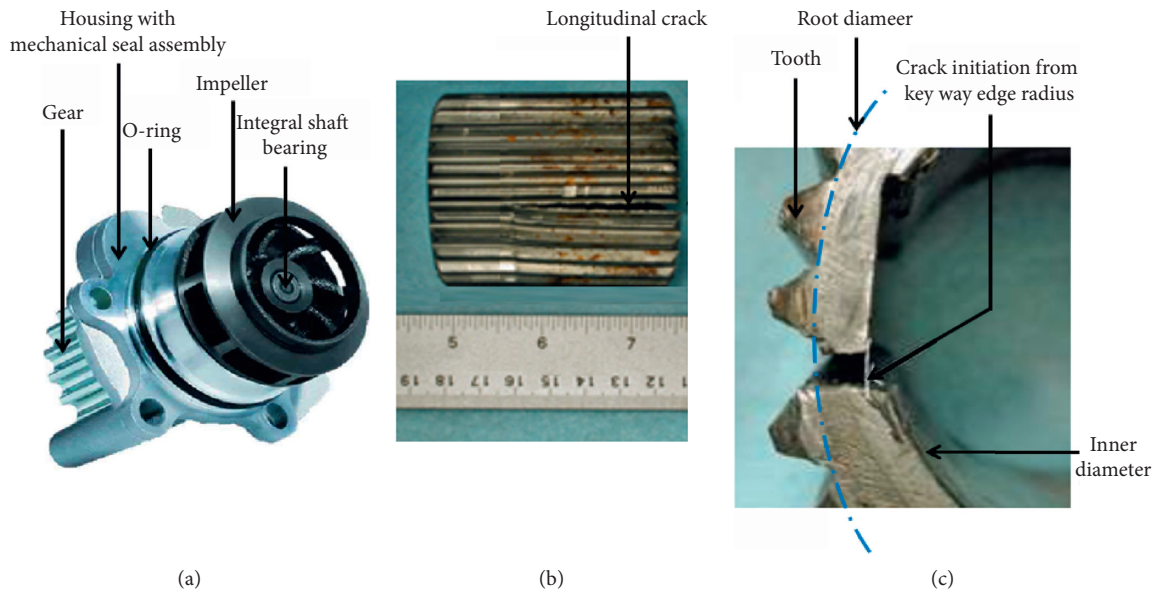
(a) Parts of an engine coolant pump, (b) Crack geometry of the failed gear, (c) Crack initiation.
